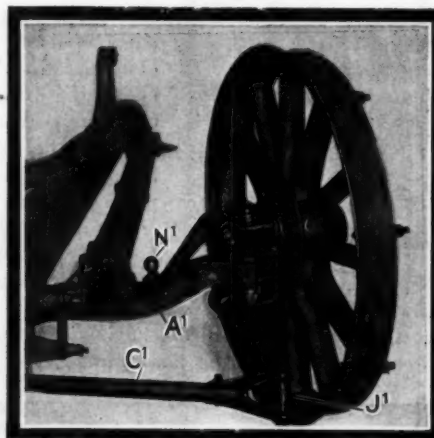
Showing the front wheel assembly and the attachment of the steering and drag-rod arms to the knuckle
